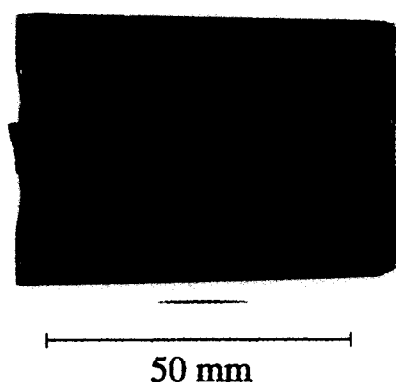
Section of cylinder made by heated sprue moulding with a 15 MPa hold pressure and mould temperature 30°C.
